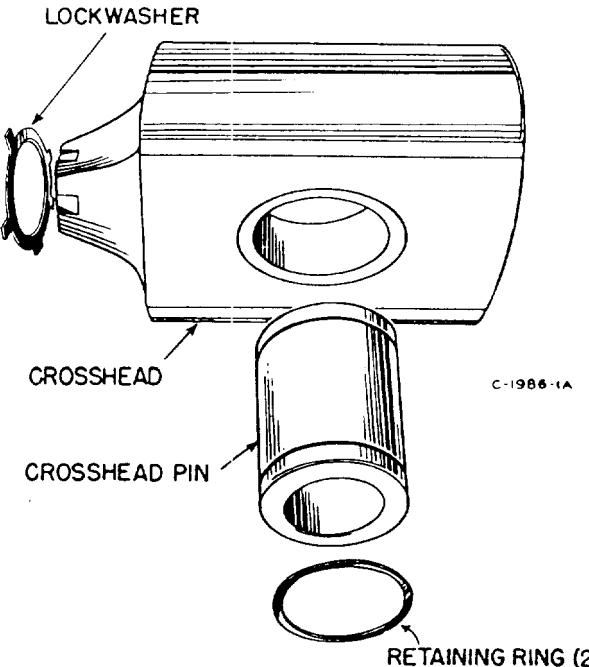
Crosshead, crosshead pin, and retaining rings.
